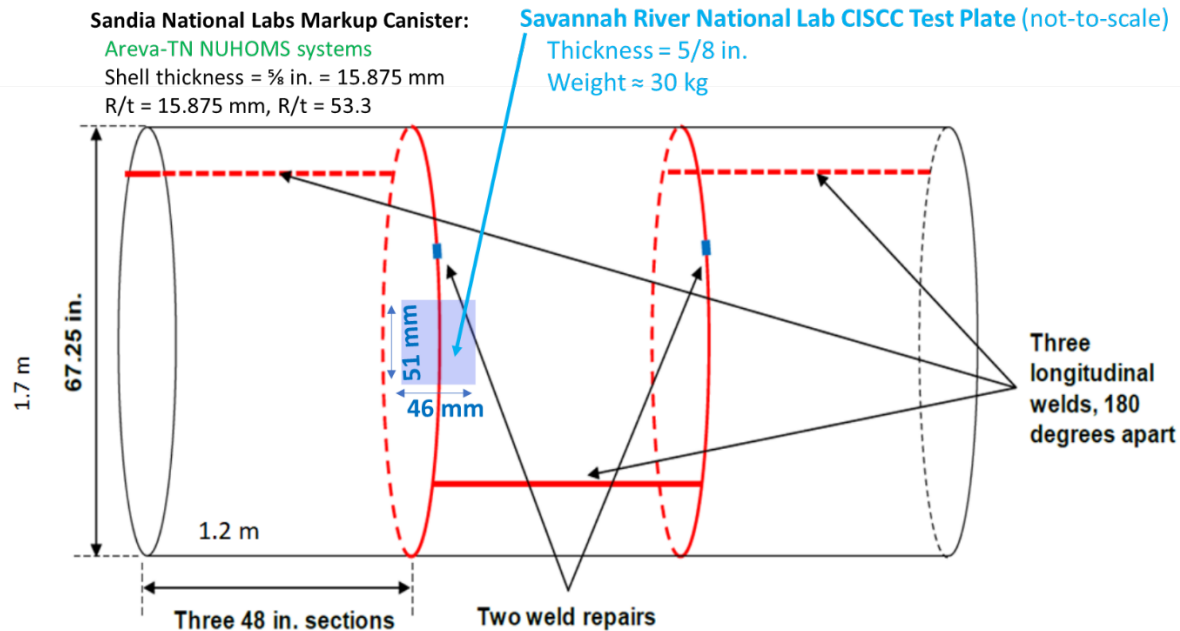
A sketch of the full size mockup canister showing the fabrication welds and the representative location where the SRNL large plate was harvested.
